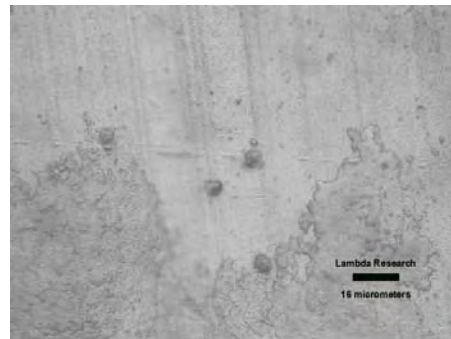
Central gage section pitting and surface oxidation produced by active corrosion during fatigue testing of a machined 7075-T6 surface.
